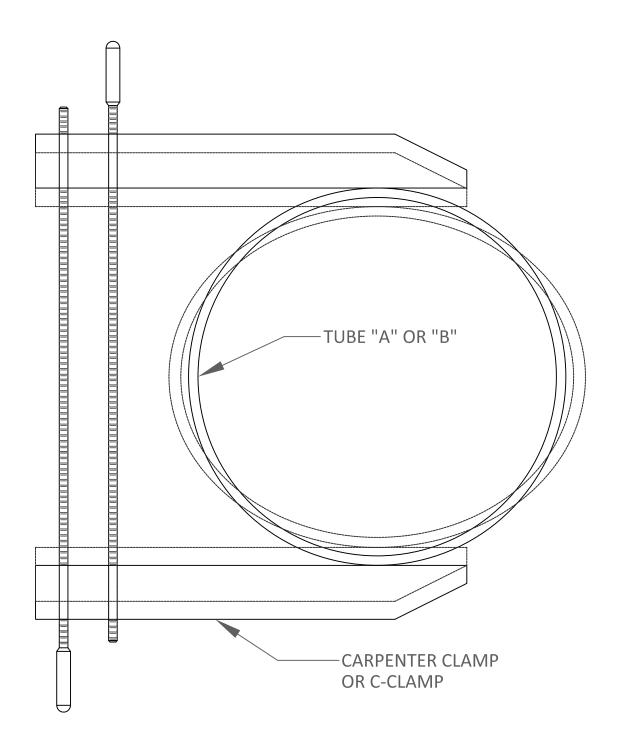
BRING 6" I.D. FIBERGLASS TUBE INTO ROUND FOR INSERTION OF TUBE CAP, TUBE SPLICE, OR STAND PLATE - IF REQUIRED
